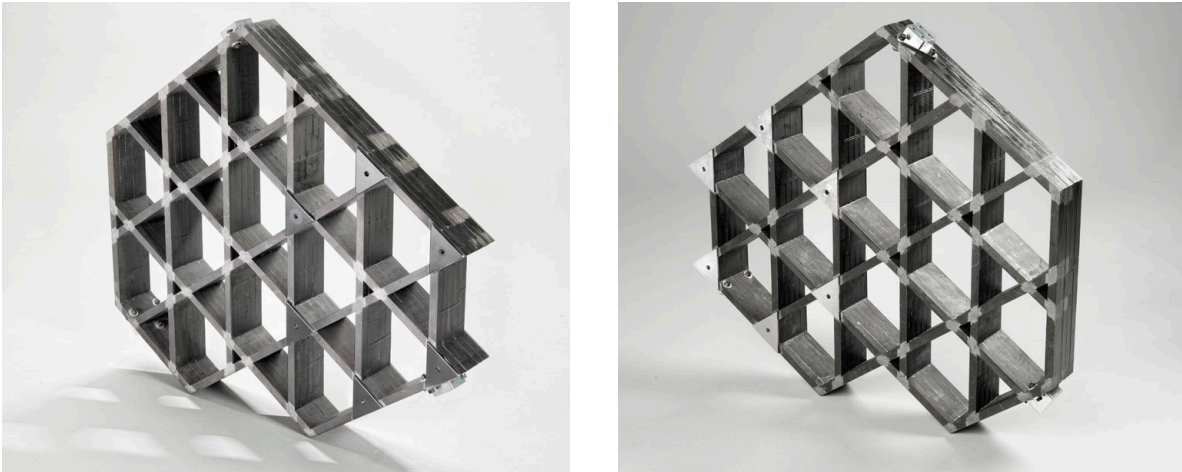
Final grid demonstrator (front view on the left and rear view on the right)
